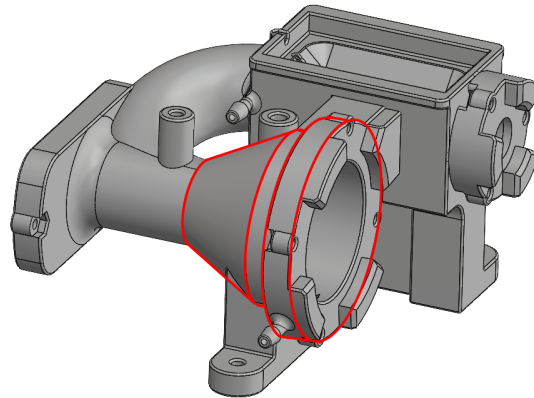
The pump section of the water tunnel (highlighted in red).
